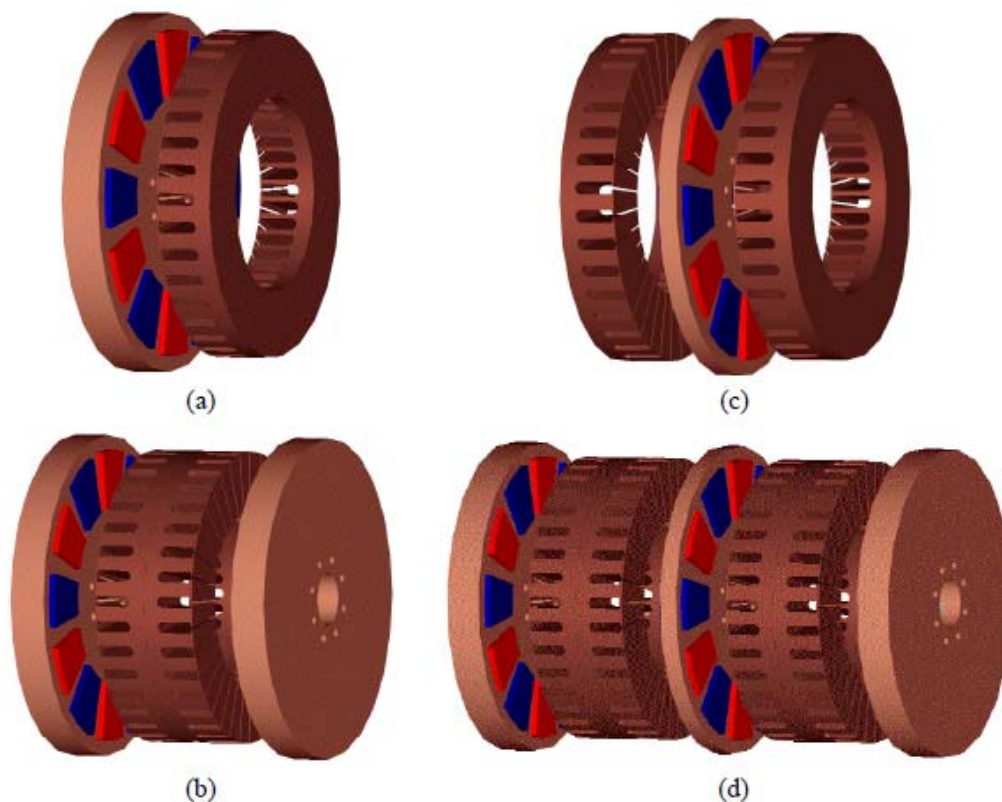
Axial Flux machine configurations: (a) single rotor single stator structure (b) Two rotors single stator structure (c) Single rotor two stators structure called “Axial Flux Interior rotor Permanent Magnet machine” (AFIPM) (d) Multistage structure including two stator and three rotor blocks
